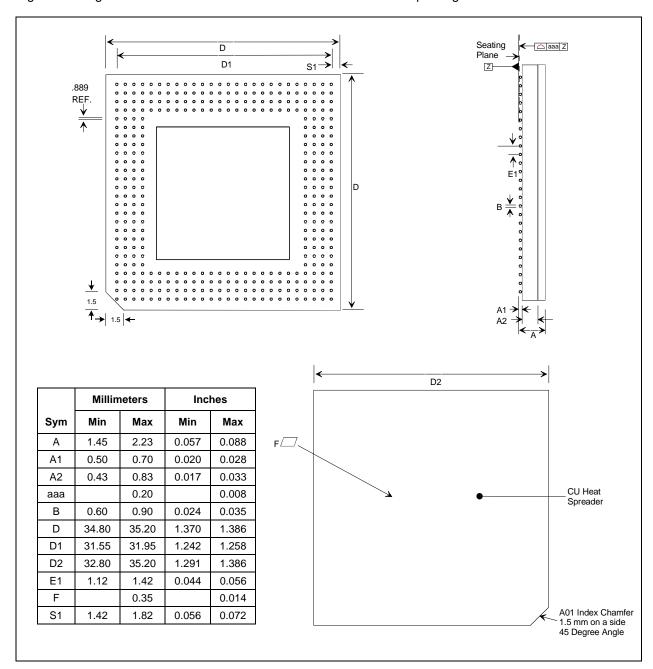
352-Terminal BGA Mechanical Package Outline
